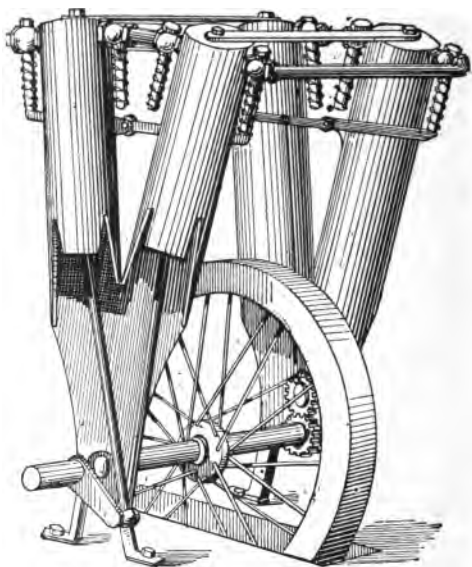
The Four-cylinder Kane-Pennington Motor.
